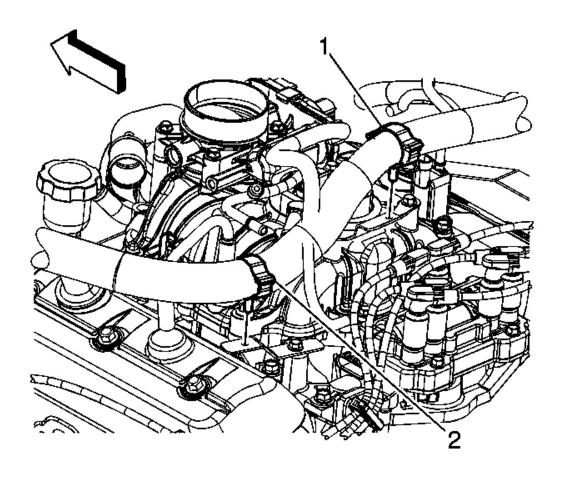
View Of Engine Wiring Harness Clips Courtesy of GENERAL MOTORS CORP.
